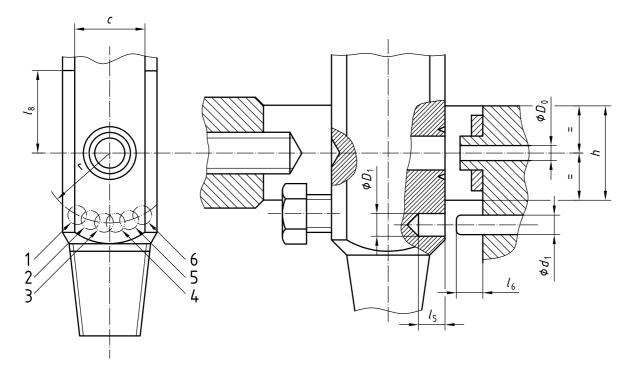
Two-pin yoke-type valve connection system with the pins in a single row
